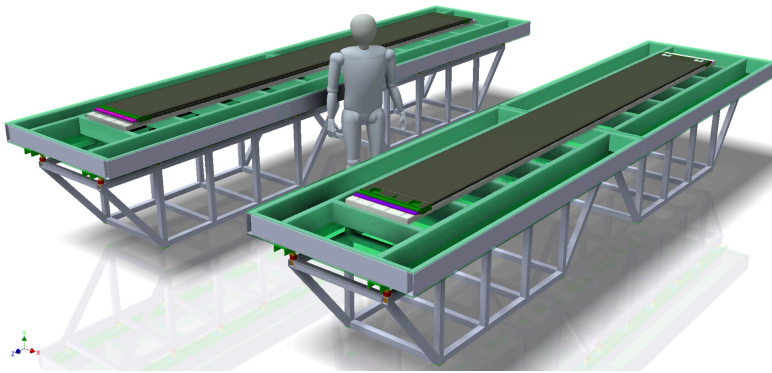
Two fully assembled modules on the module assembly table [57]. The fibre ends (pink) are still sticking out until the ROB box is connected.
